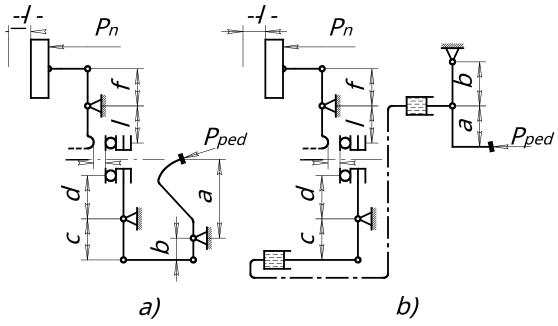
Kinematic schemes of mechanical and hydraulic clutch drives
